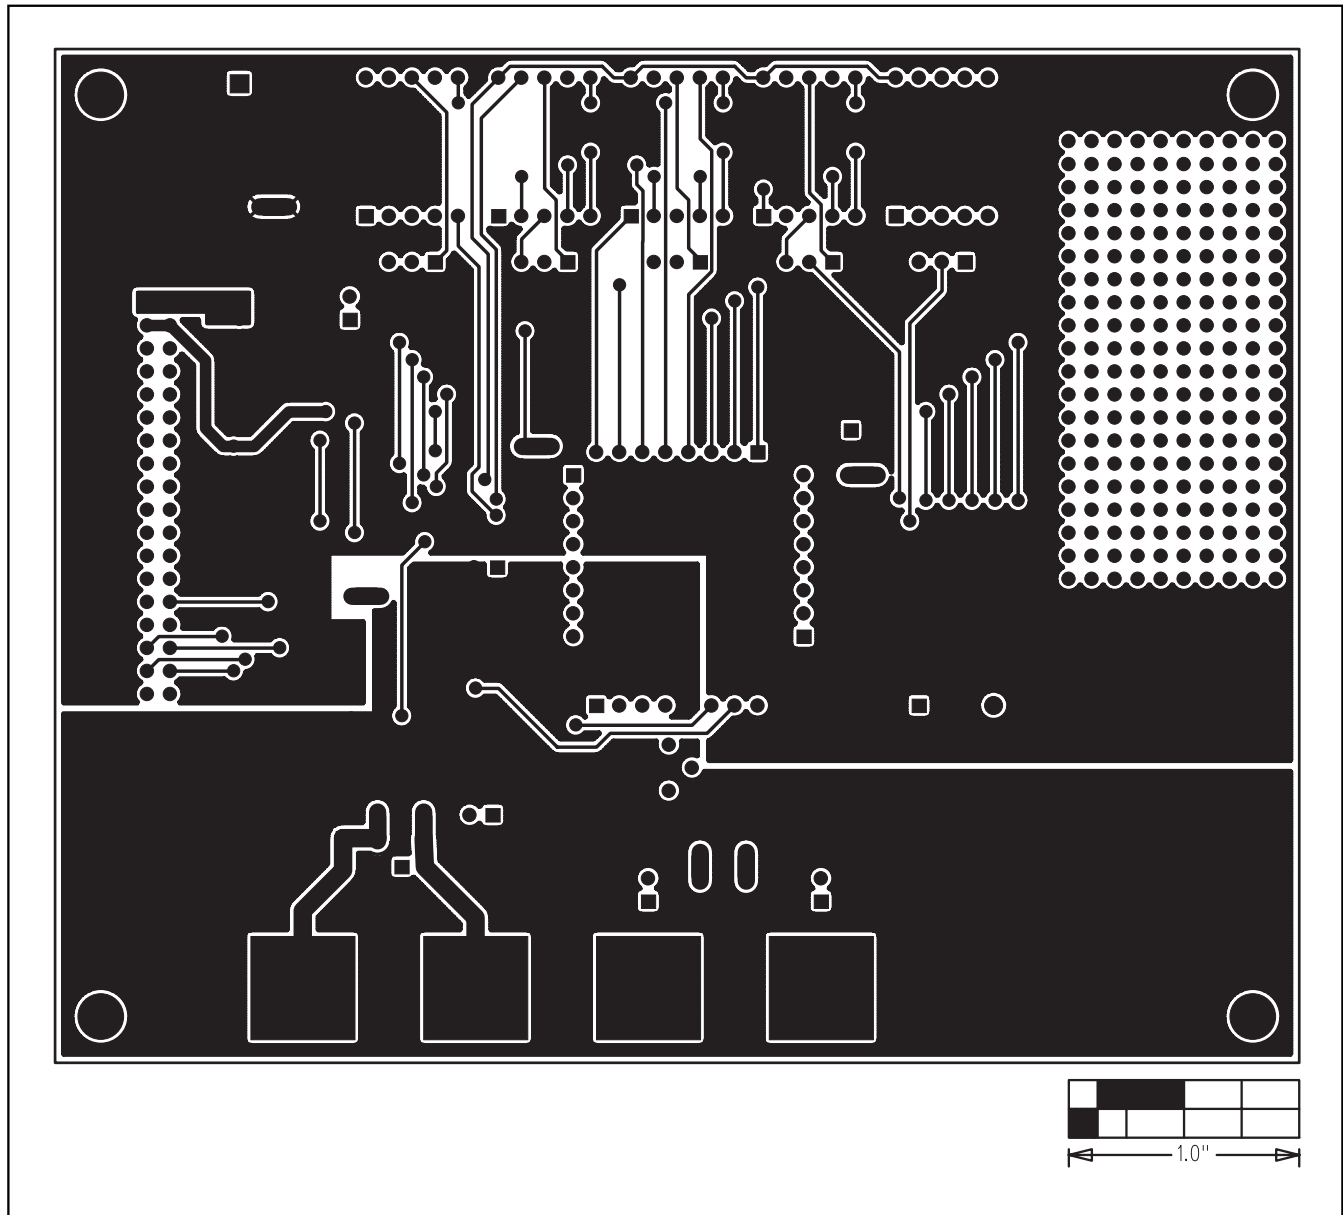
MAX1499 EV Kit PC Board Layout—Solder Side
